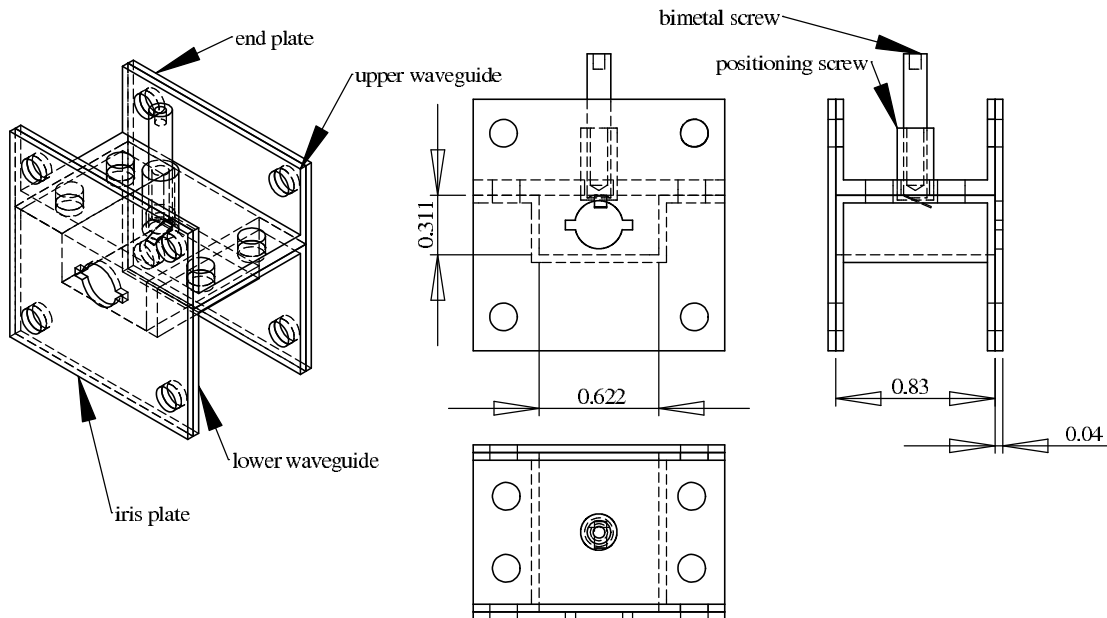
Scale drawings of the resonator prototype (1:1, all dimensions in inches)
